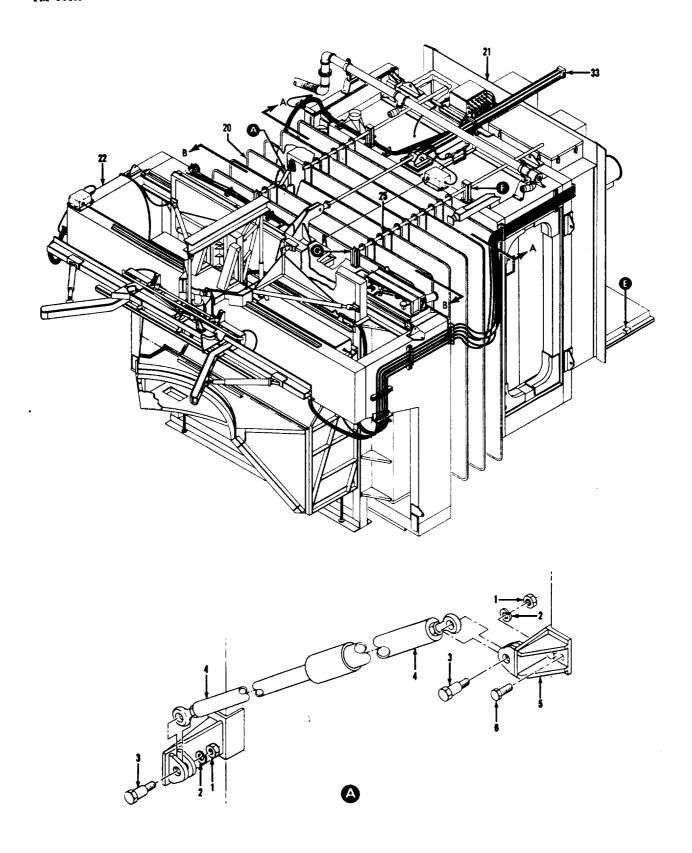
Environmental Chamber Structural and Mechanical Assembly (Sheet 1 of 4)
